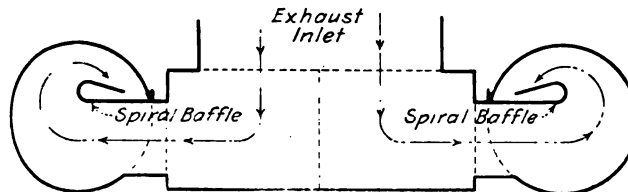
BASE AND DOUBLE WING CONDENSER, ILLUSTRATING EXCESSIVELY LONG STEAMWAY
